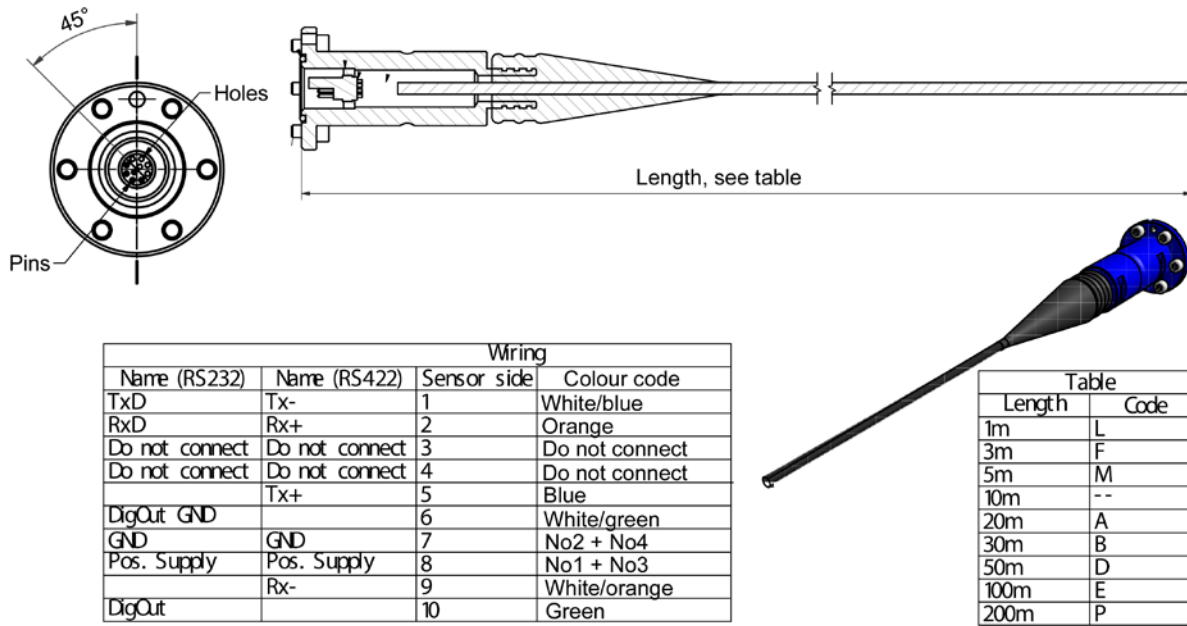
Drawing Free end Cable 4680, RS-232/RS-422 with twisted pair.
